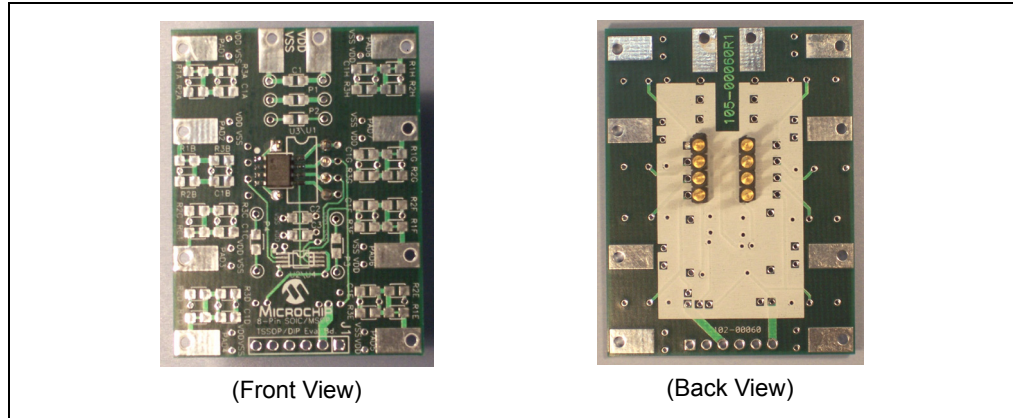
Op Amp in SOIC-8 package soldered to a separate board.
